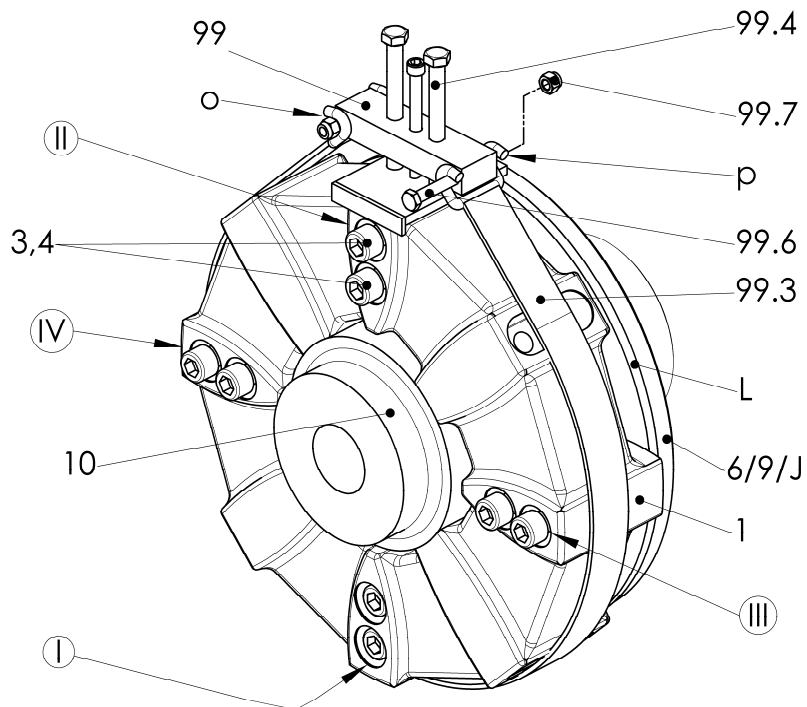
Mounting the axial screws with the help of the mounting fixture
